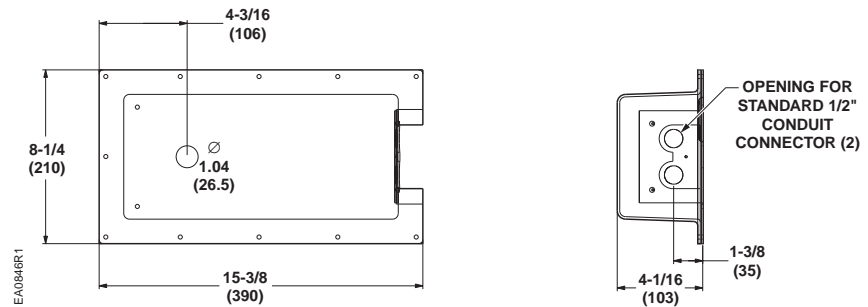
Dimensions of the ASK75.1U Weather Shield in Inches (Millimeters).
